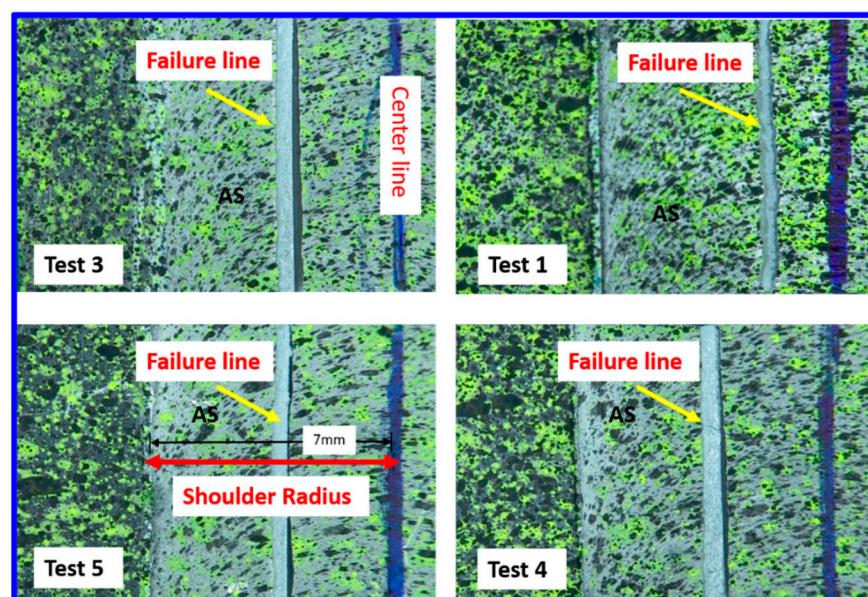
Fracture line location in four FSW tests after the simple tensile test.
